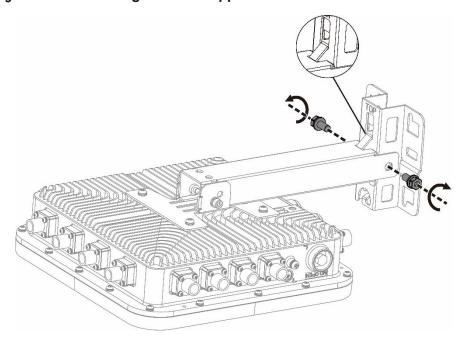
Connecting the Mounting Bracket and Installation Pole Based on the Ceilingmounted Direction
